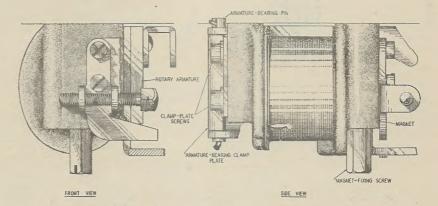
ADJUSTMENT OF ROTARY-ARMATURE BEARING-PIN CLAMPS
